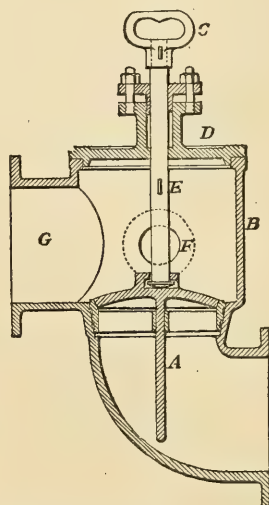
Brass Discharge Valve and Seat, with cast-iron Valve Chest for Discharge Pipes from Hot Well. — A, Valve. B, Chest. C, Lifting eye and spindle. D, Cover. E, Hole for cotter. F, Hole for donkey feed-valve box. G, Branch at side of ship.
